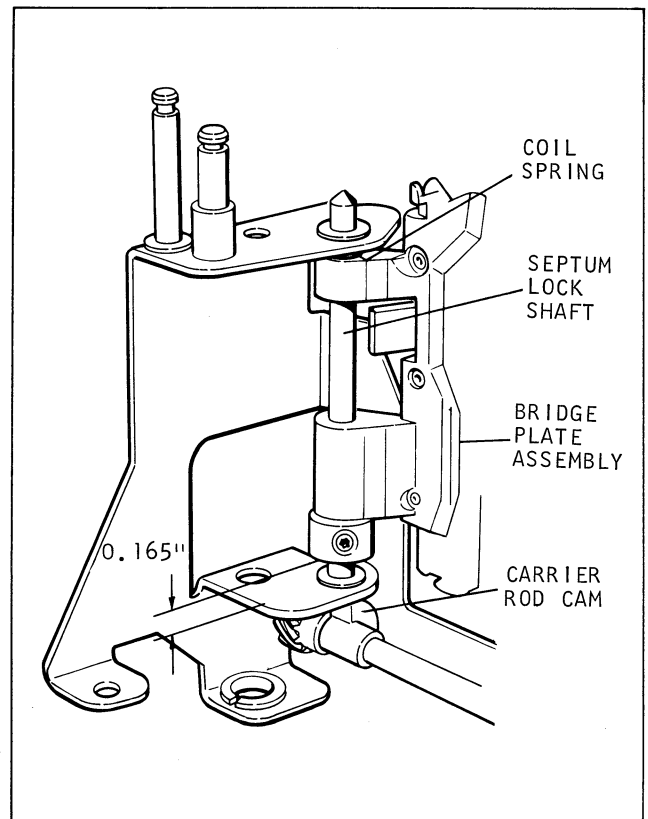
Figure F. Septum Lock Shaft Bushing Spacing (Early Model Projectors Only)
